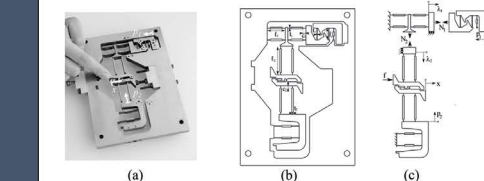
(a) A prototype of the T-mechanism manufactured by electro discharge machining, (b) Top view of the mechanism, (c) Forces and displacements.
